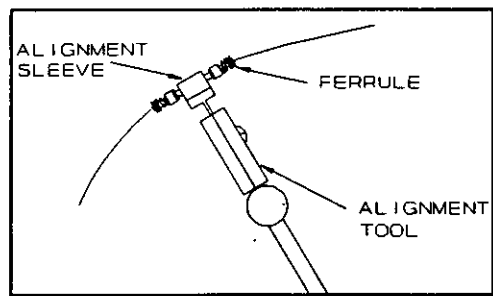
D1-3. Inserting second ferrule into alignment sleeve.
